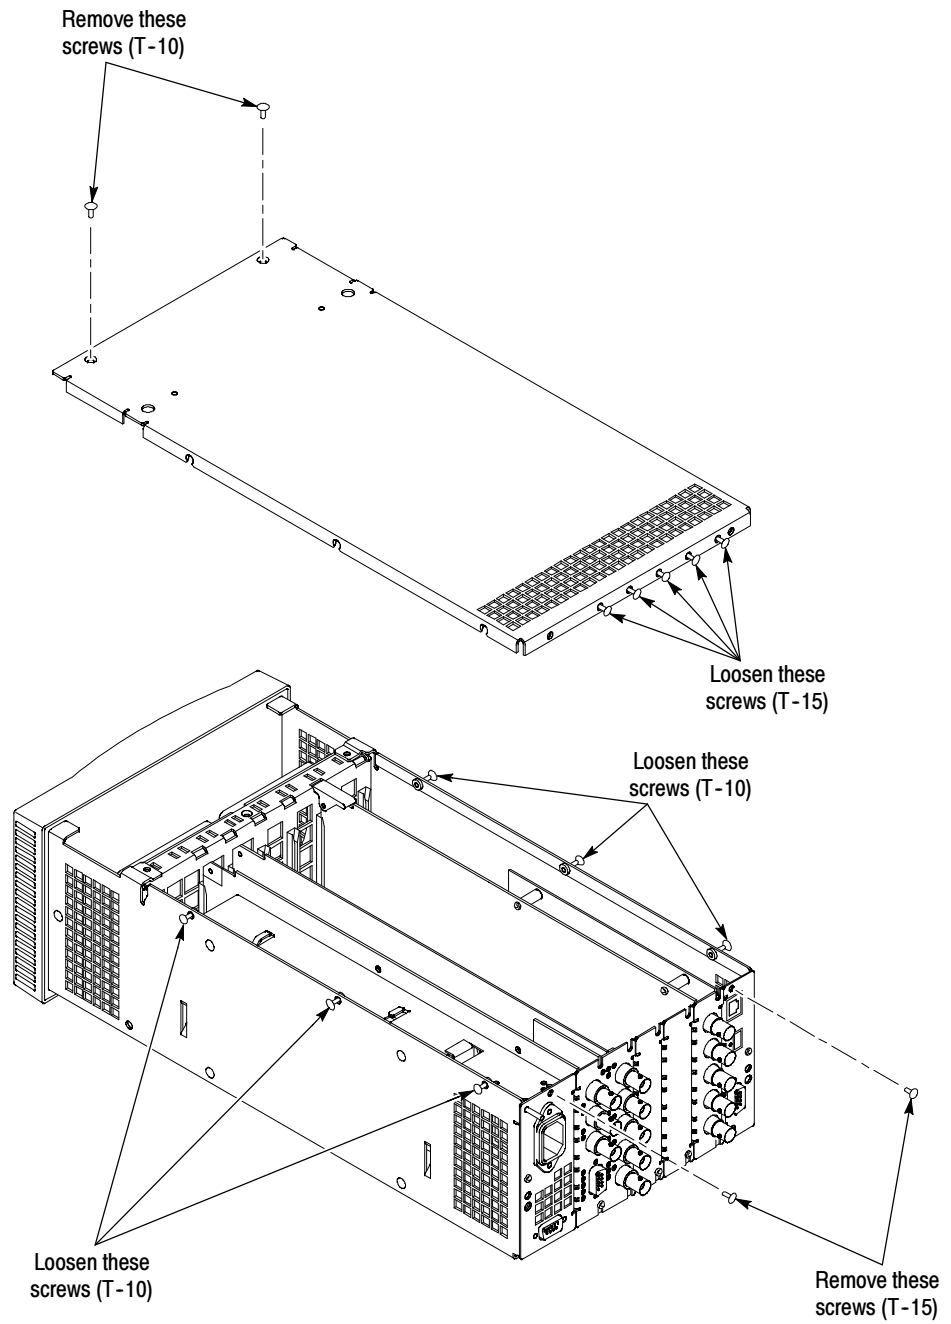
WFM700 chassis, showing screws to loosen and remove
